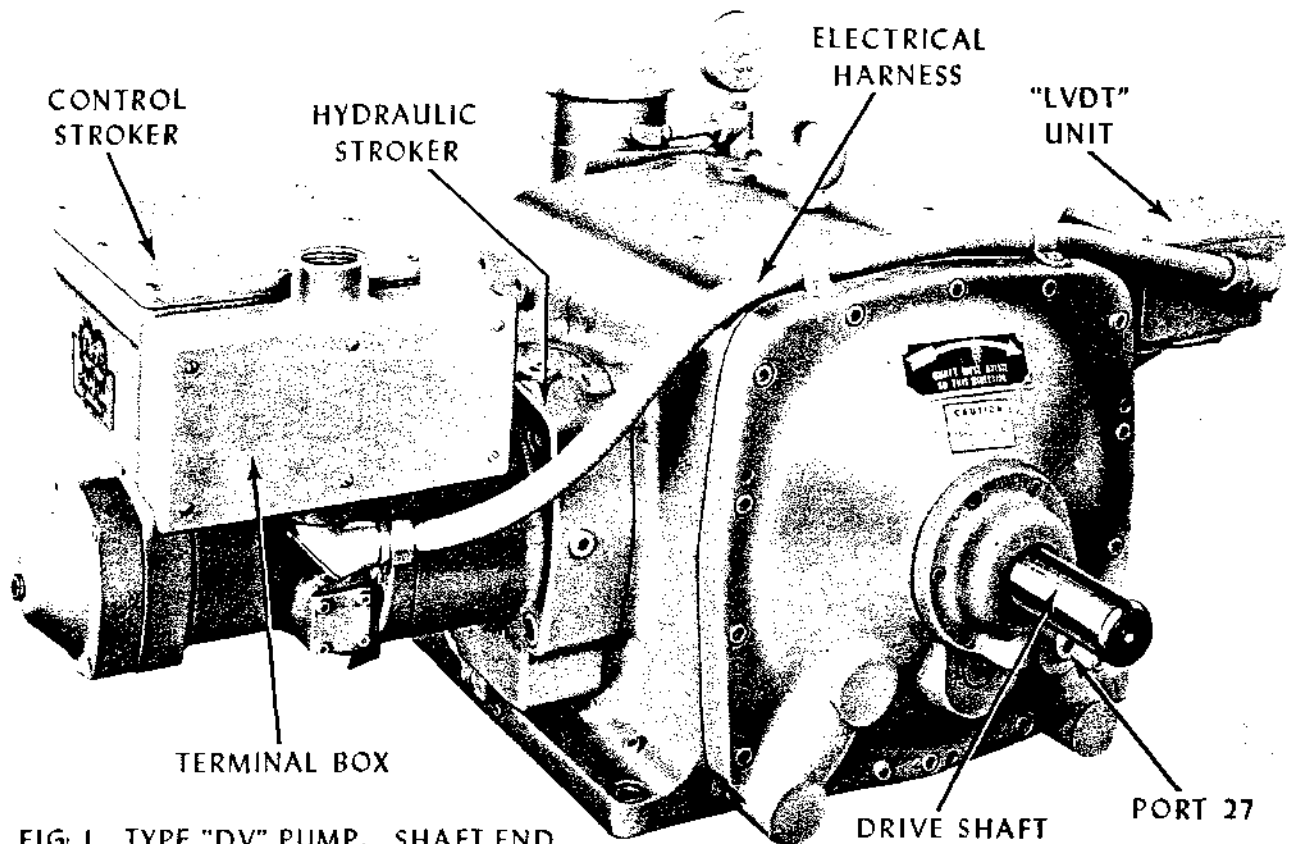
TYPE "DV" PUMP, SHAFT END.
